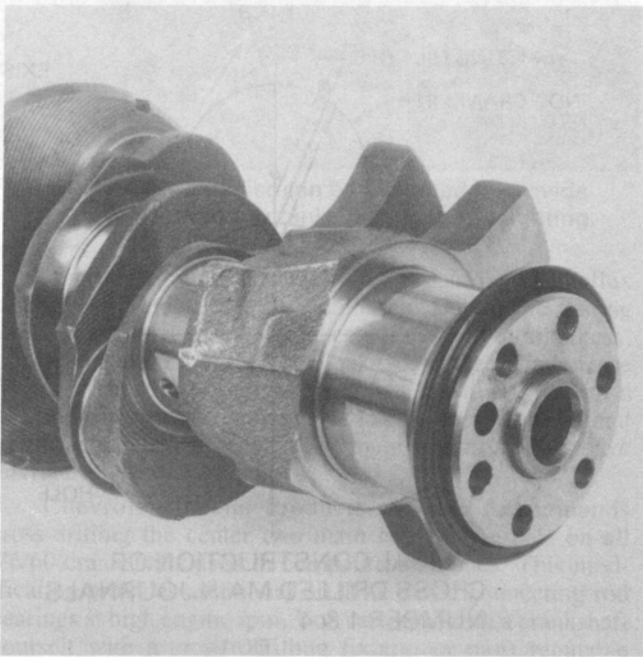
Large journal crankshaft flywheel flange and one-piece rear seal.
